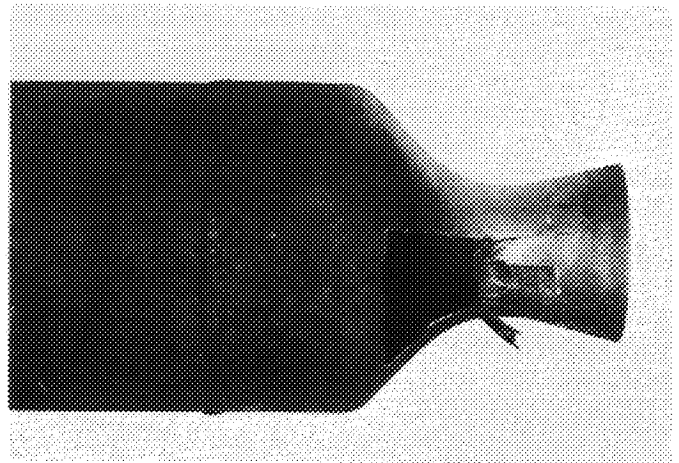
Tungsten thrust chamber after testing, showing failure at throat
